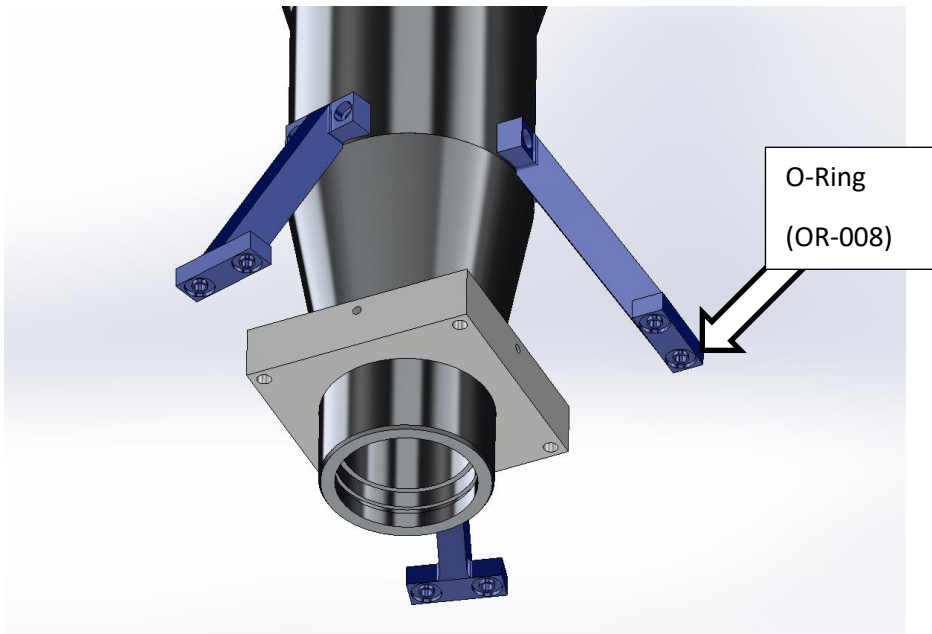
O-ring underneath Screw hole. There are six O-rings in total.
